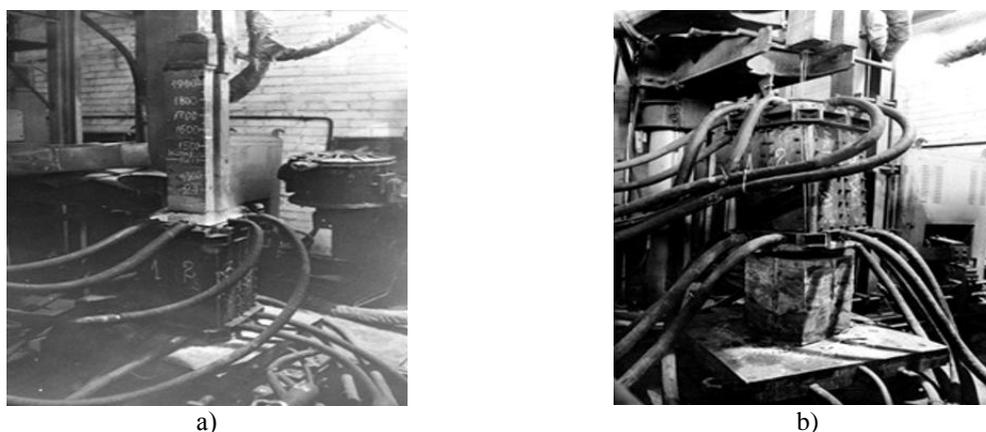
View of electroslag casting stamping cube in the smelting process of bifilar scheme (a) and after melting (b)
